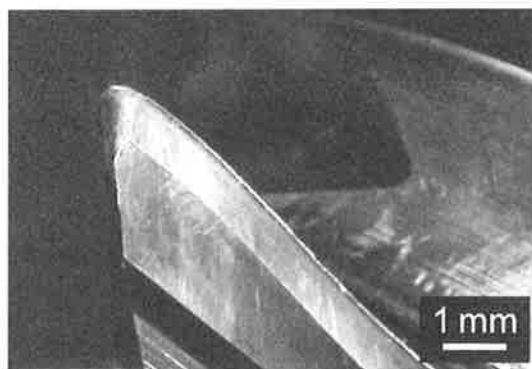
Observation of a cutting edge of tool A after machining for 50 min.
